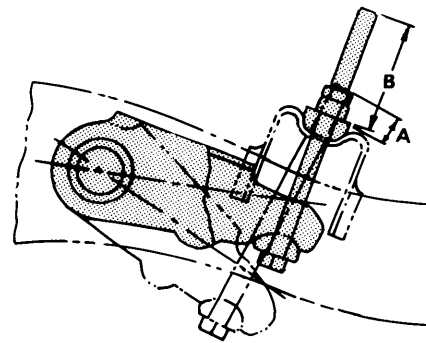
View Showing Measuring Points for Installation of Anchor Arm
